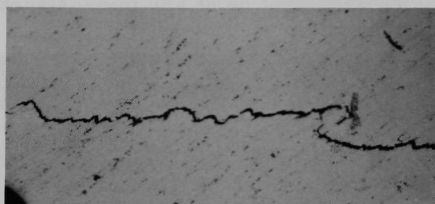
Perpendicular Section at Base of Axial Crack in Cylinder of Lead-cutting Tool (as polished). Mag. 75X.
